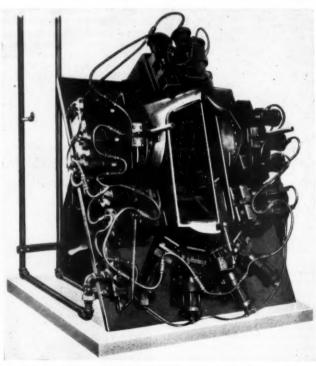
Piercing machines, for piercing all holes, lace holes, fender flanges, etc. in a radiator shell for popular make motor car. Nineteen piercing units are used, some carrying as many as five punches.
